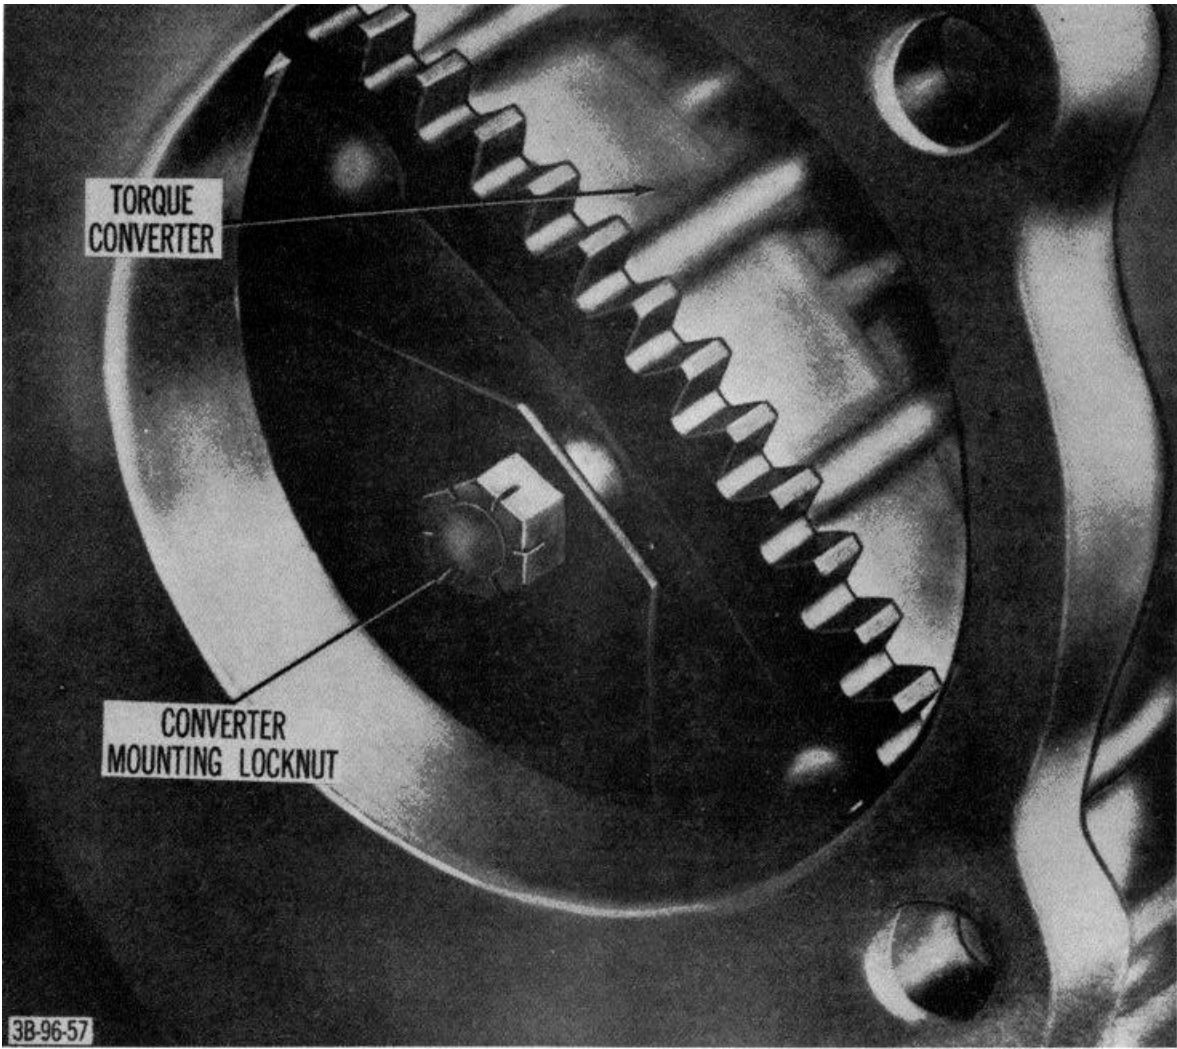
Mounting locknut on torque converter, viewed through starter opening.
